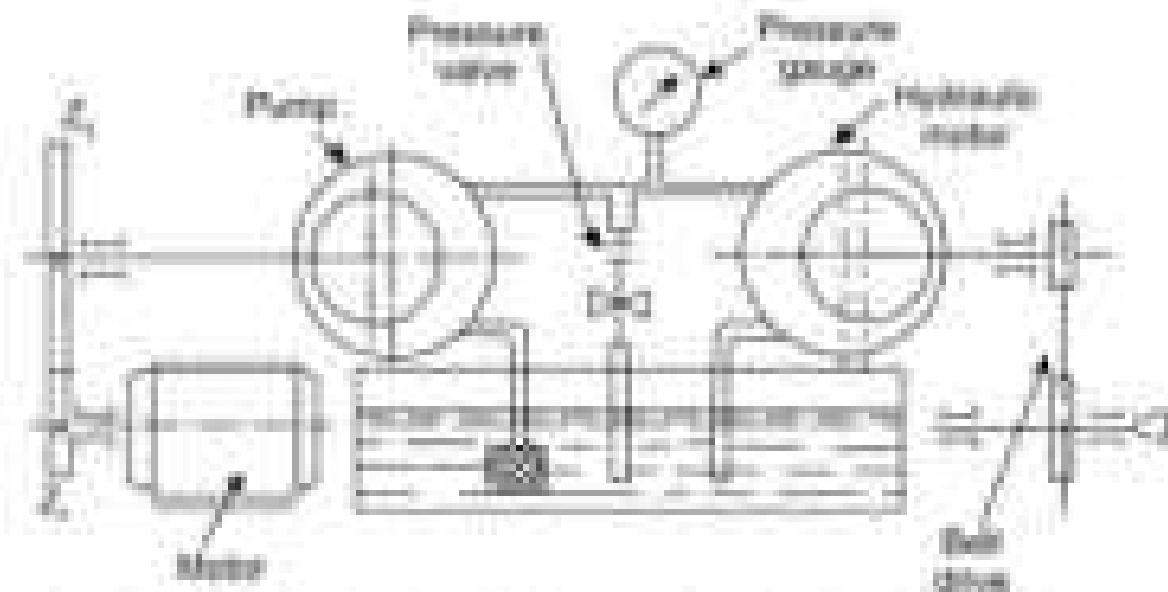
Schematic diagram of a rotary hydraulic drive
